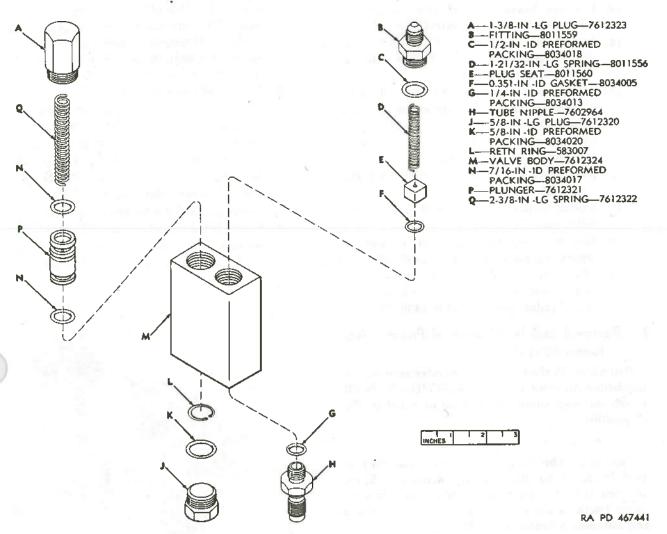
Hydraulic valve assembly 7612325—exploded view.
